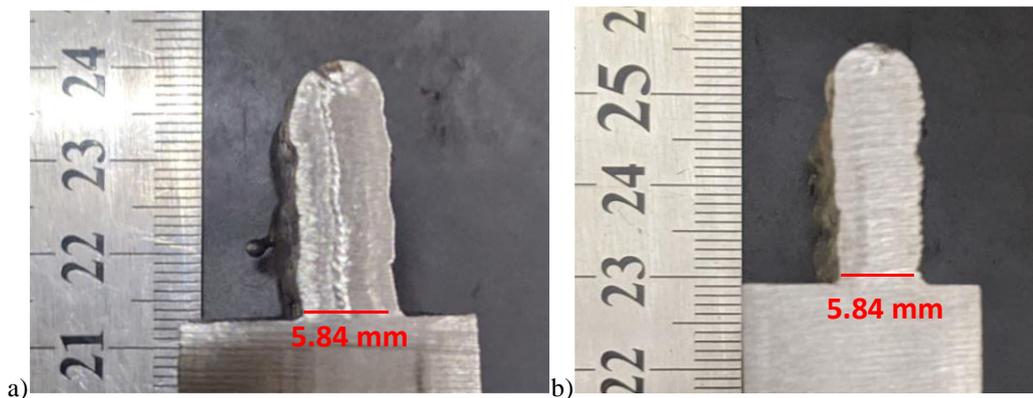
Area of the cross-sectional view of the preform a) with natural cooling. Area of the cross-sectional view of the preform b) with forced-air cooling.
